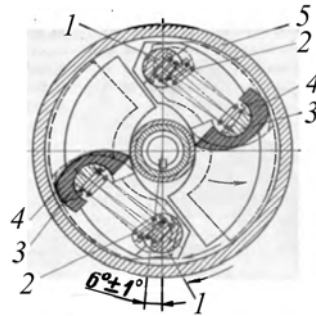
Automatic timing device for diesel engine fuel: 1 – driven plate; 2 – drive plate; 3 – pins; 4 – weights; 5 – springs
